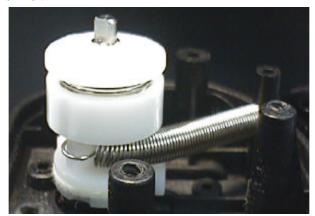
Side View of the Ribbon Supply Spindle Assembly
